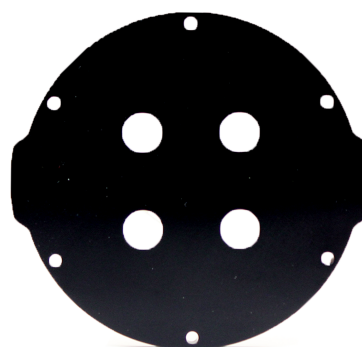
Aluminium End Cap with 4 holes (3" Series)
